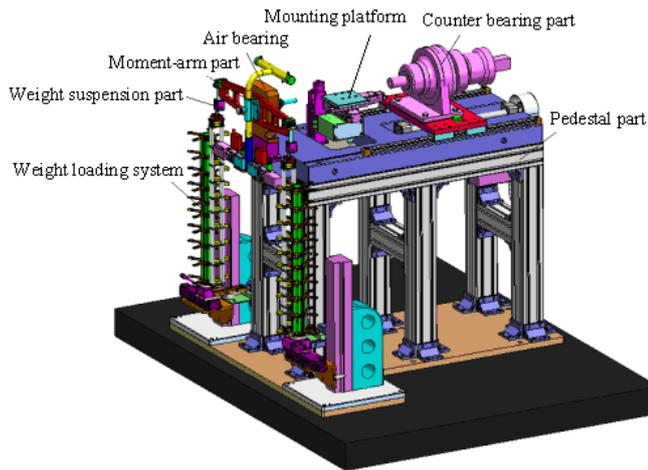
Mechanical structure of the 1 N·m torque standard machine.
